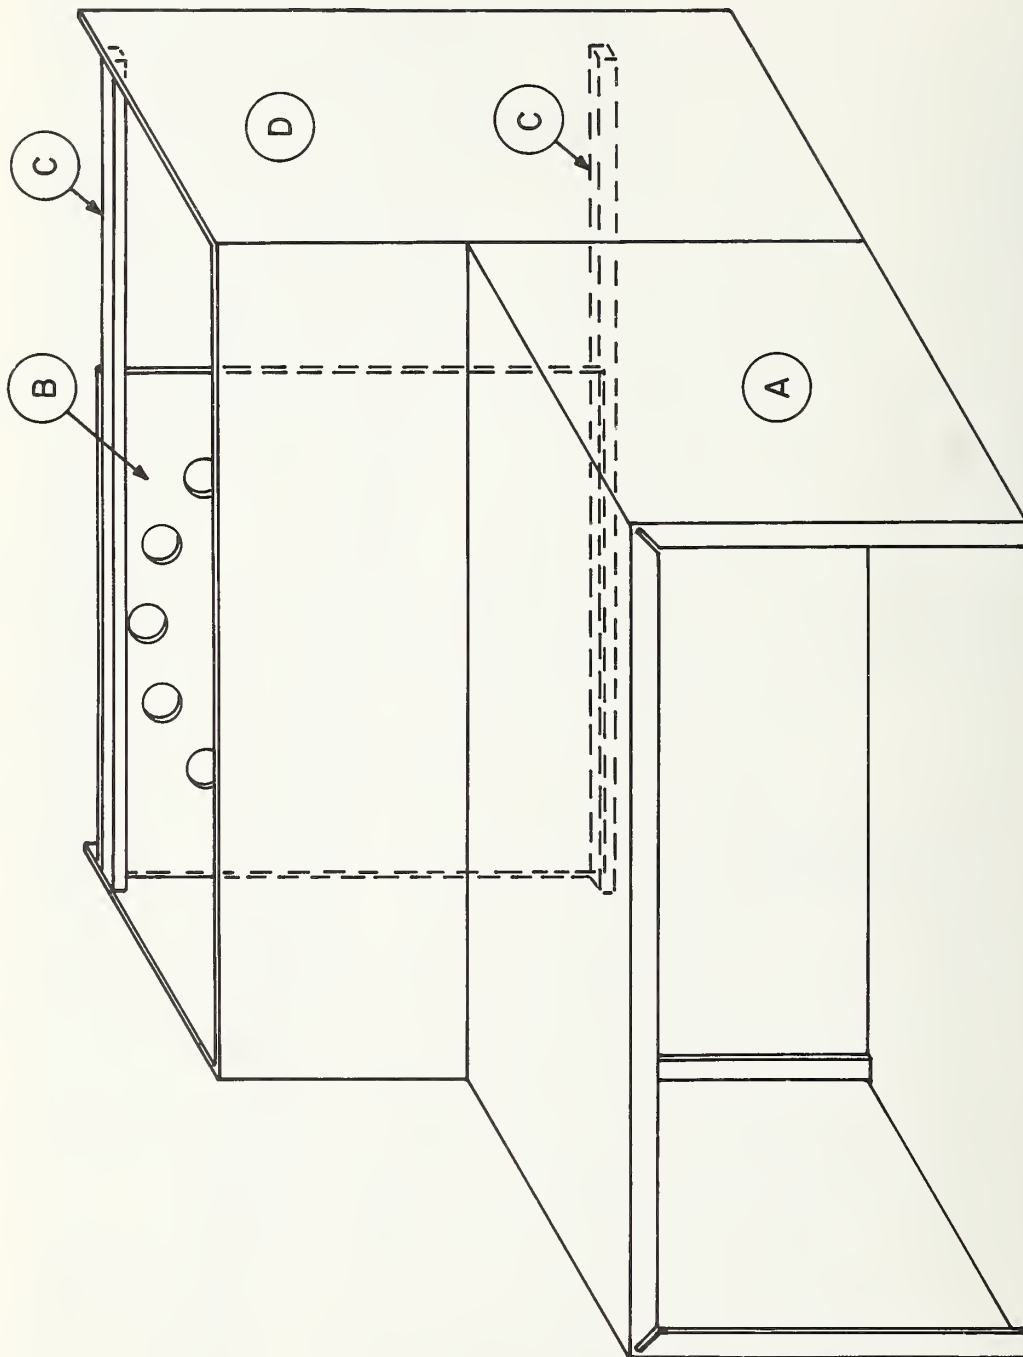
Sketch of the mechanical assembly of the main enclosure.
